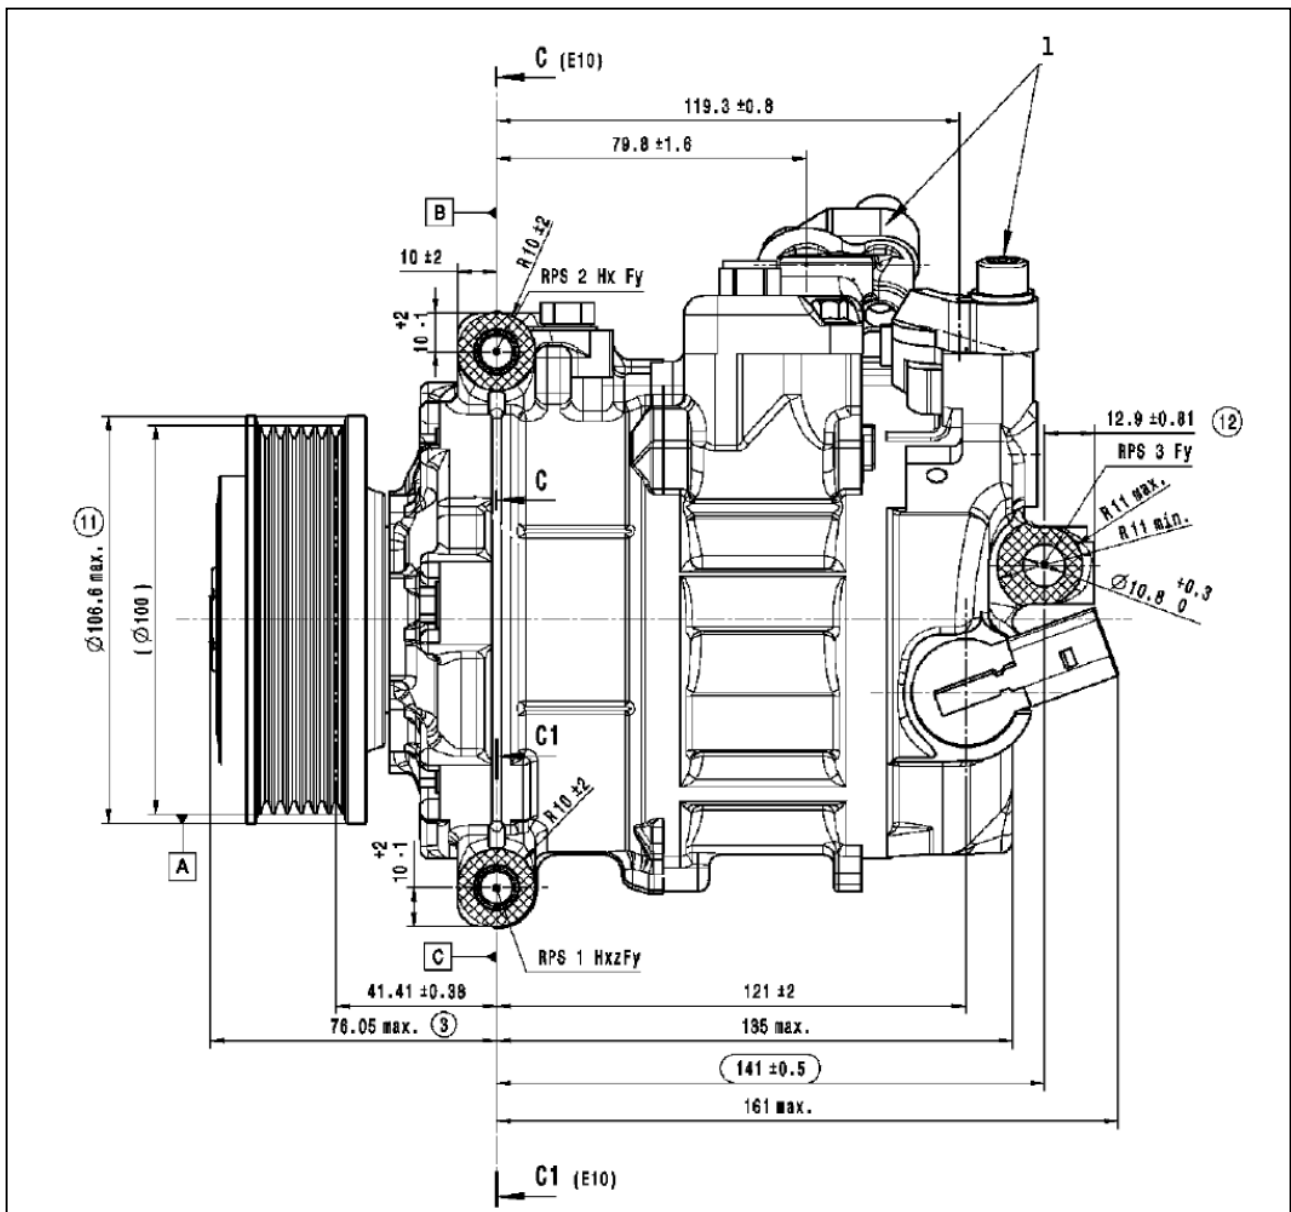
Dimensions of air conditioner compressor Denso 7SU17 (7E0.820.803), pulley diameter 100 mm, (side view)
